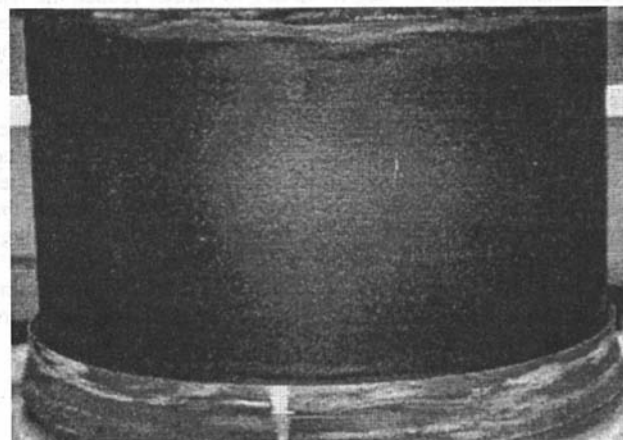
CSGT rotor with AS-800 first stage blades prior to 100 hr engine test
